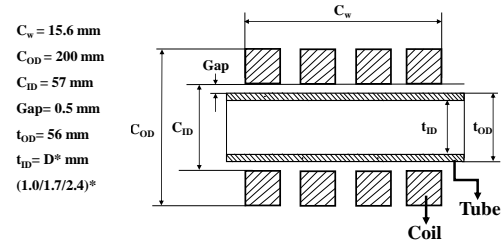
Sectioned view of coil and tube assembly in compression coil
